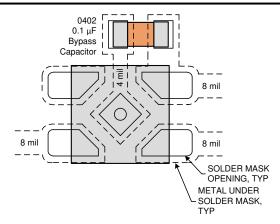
Example Layout With DPW (X2SON-5) Package
